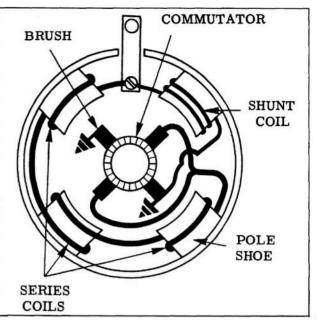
Field Windings (30, 31, 32, 33 and 34 Series with L.C. Engine
